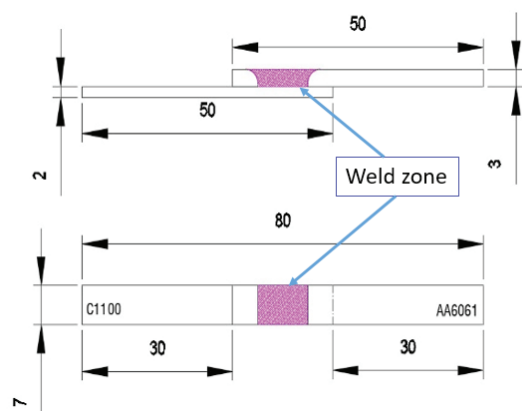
Dimensions of the test samples of AA6061 and C1100 alloy plates.
